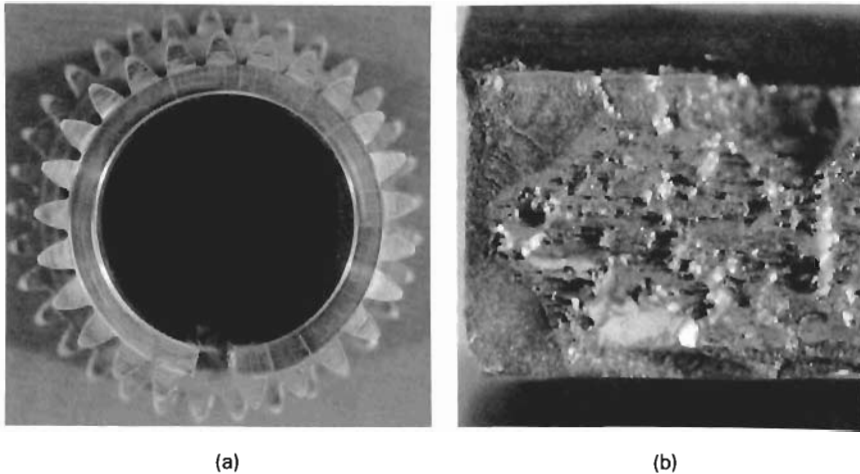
(a) Spur gear showing radial cracking due to frictional heat against the thrust face; 0.5 \times . (b) Progression of thermal fatigue produced by the frictional heat; 2 \times .
